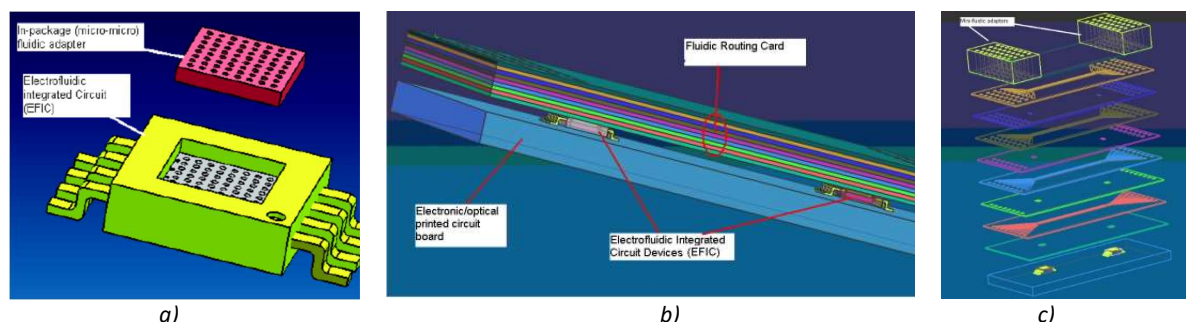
(a) Exploded 3-D View of EFIC Package, (b) EFICs with Fluidic Routing Card & Printed Circuit Board, (c) assembly layout with mini to mini-fluidic adapters at top. The bottom layer (layer 1) is a printed circuit board with 2 EFIC's. Layers 2–10 are the fluidic routing card, and the two blocks at the top are mini fluidic adapters
